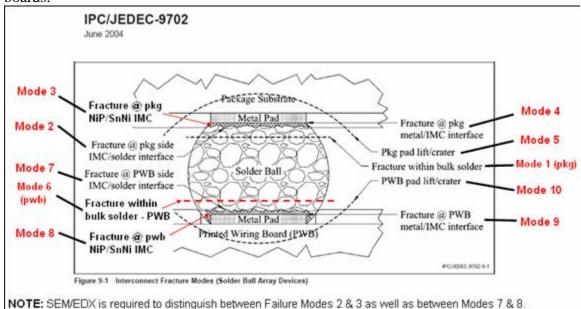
Interconnect Fracture Modes (Solder Ball Array Device) IPC 9702.
